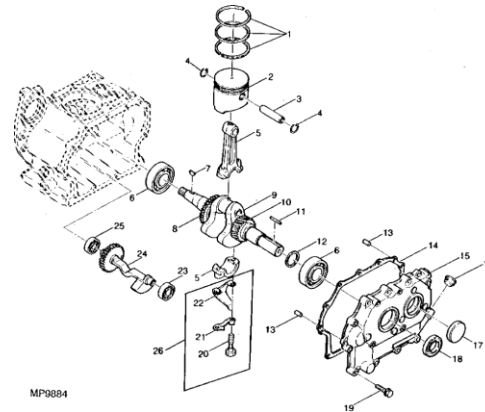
EXPLODED VIEW OF A SINGLE CYLINDER ENGINE SHOWING THE CRANKSHAFT MOUNTING IN THE ENGINE.
